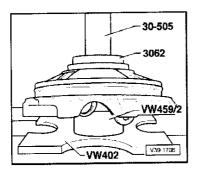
> Driving outer race for small taper roller bearing into gearbox housing
